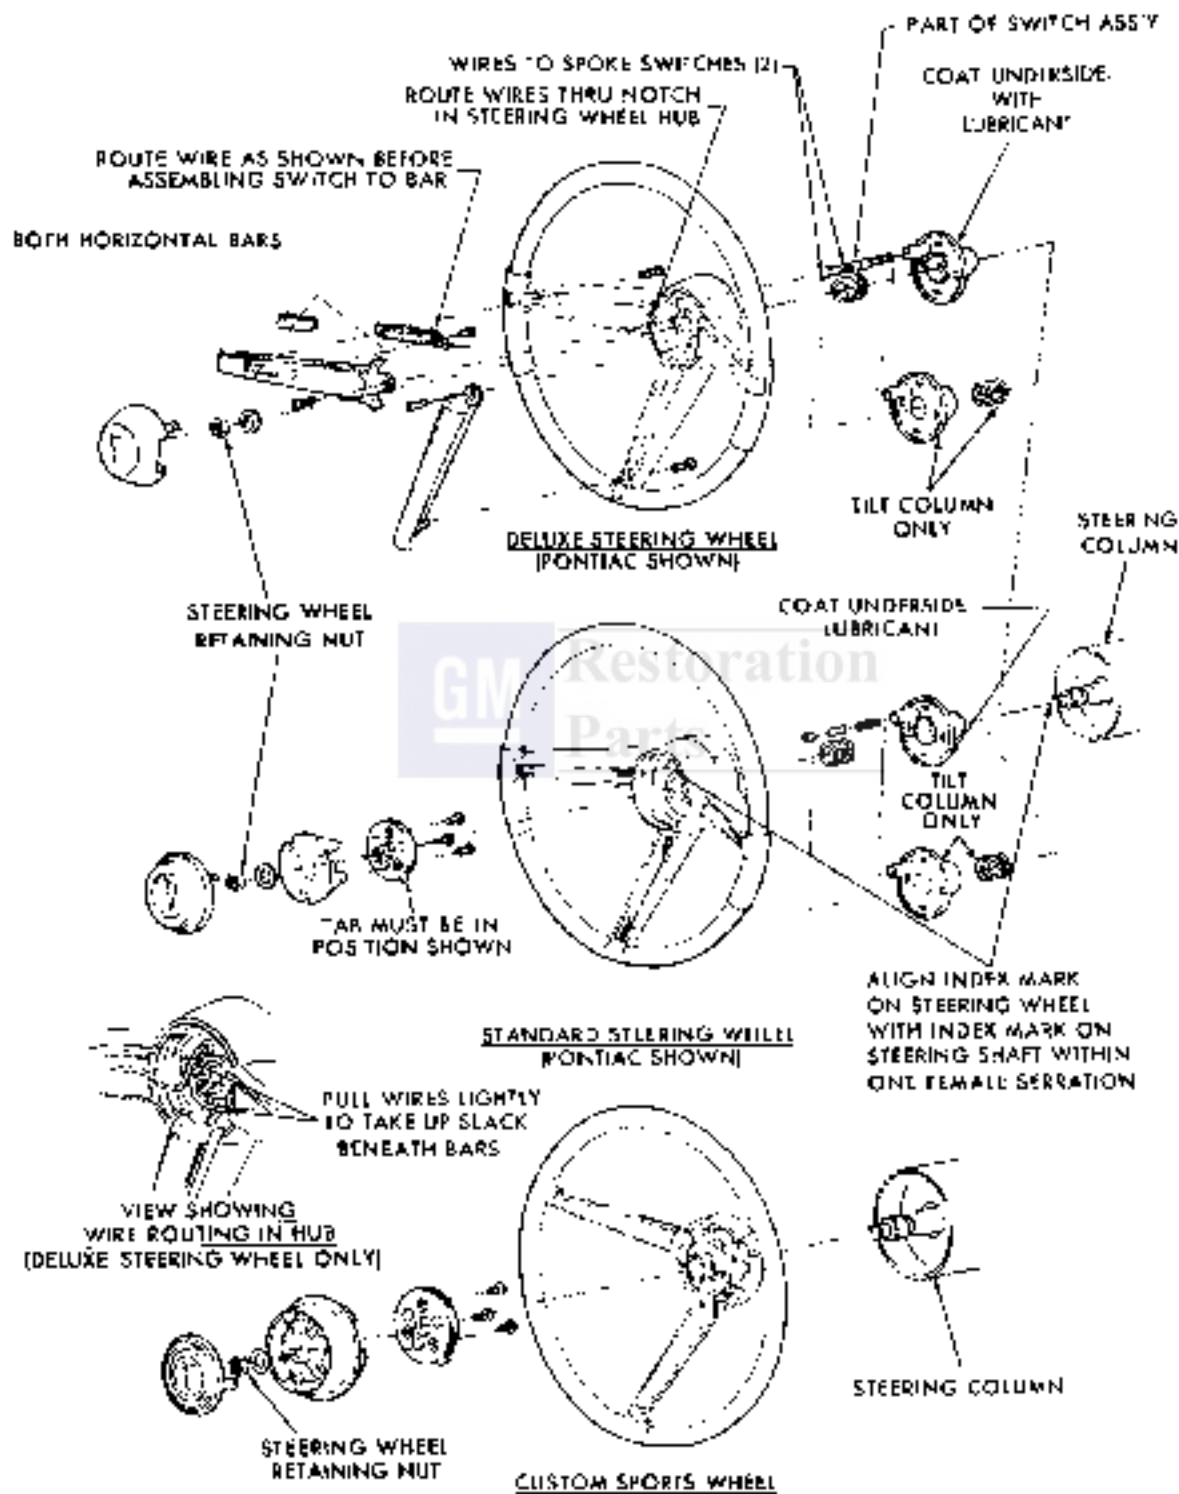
Exploded View of Steering Wheel and Horn Button
